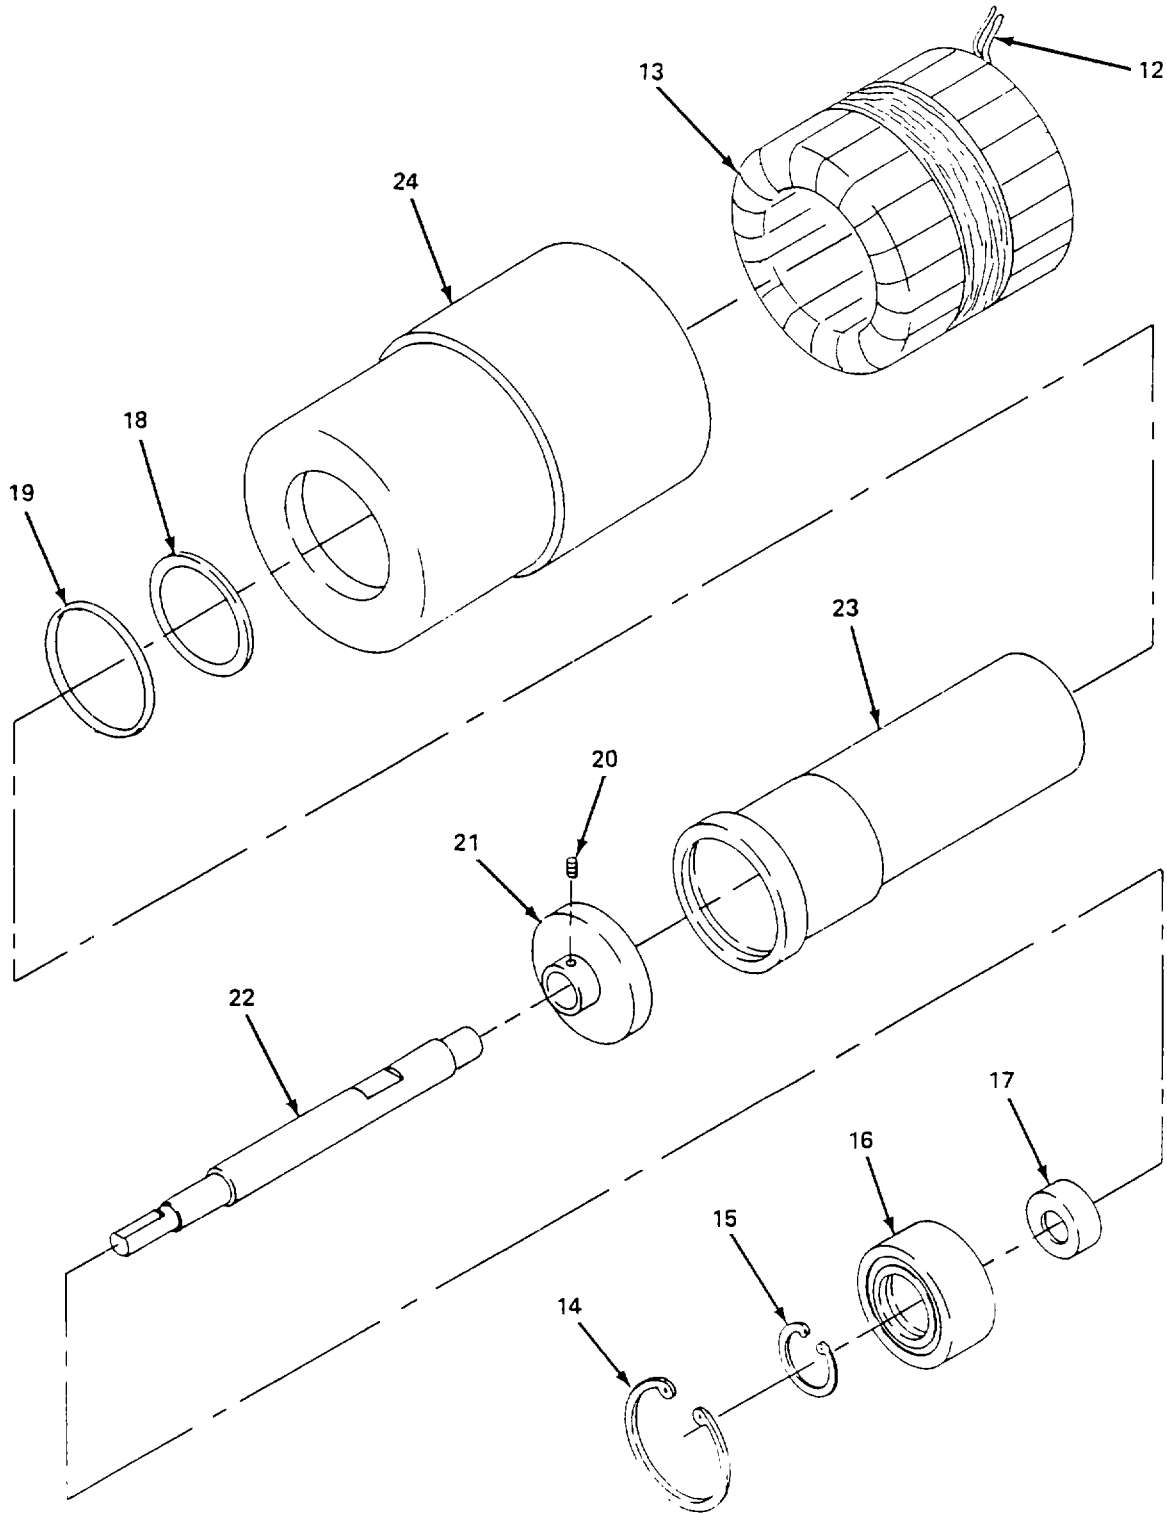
Motor, Repair (Sheet 2 of 2).
